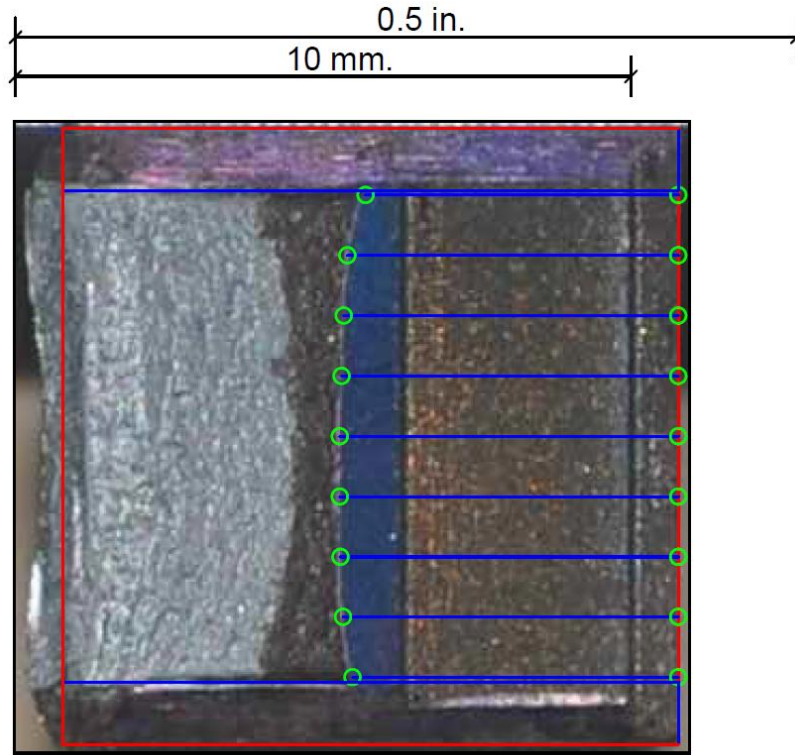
Specimen E17' Fracture Surface
